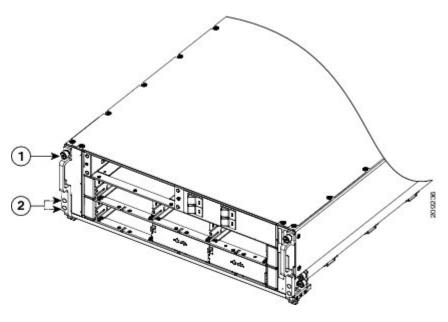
Remove Bolts that Secure Rear of Power Shelf to Rear of Chassis
